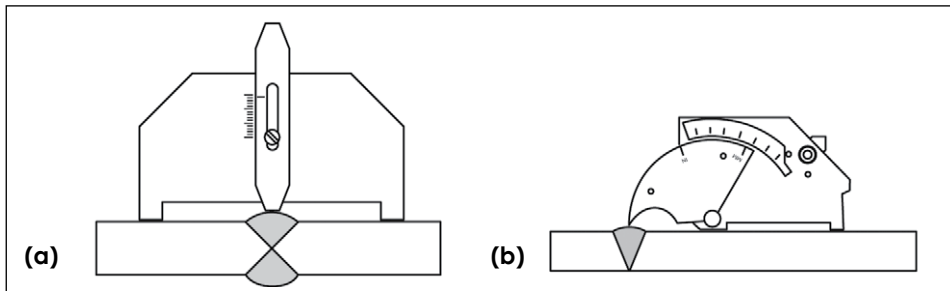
Tools for measuring crown height: (a) palmgren gage; (b) cambridge gage.
